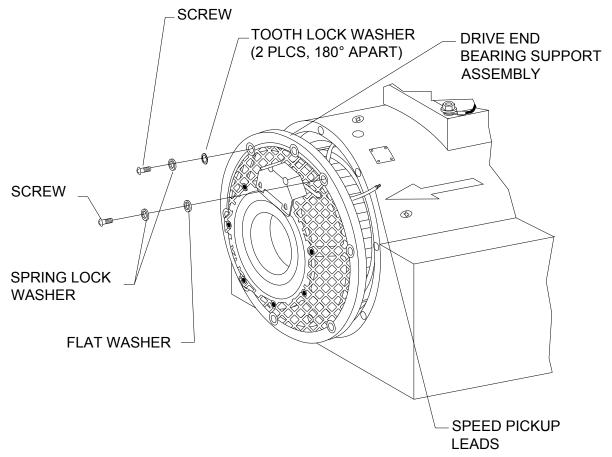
Removing Drive End Bearing Support Assembly from Stator and Housing Assembly
